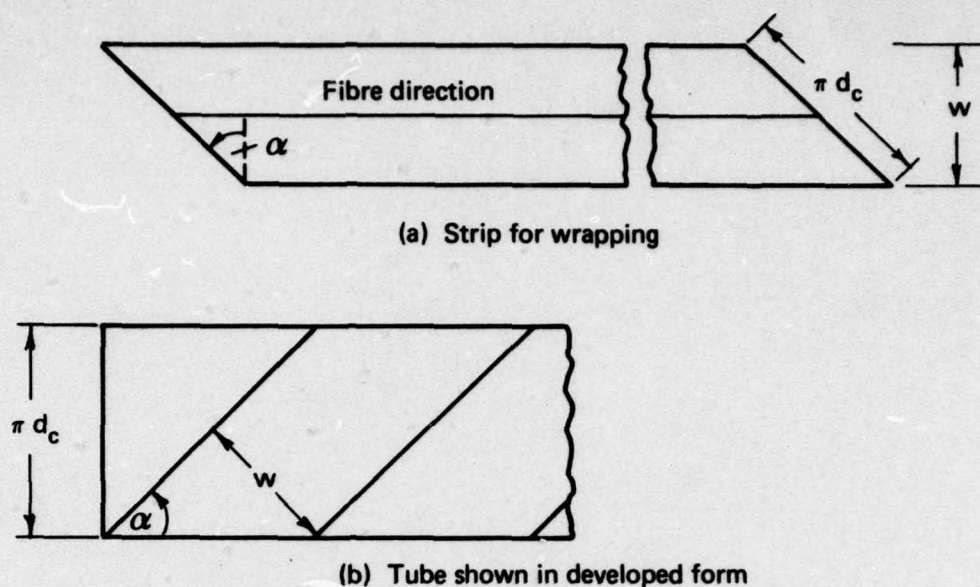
SHEET WRAPPING PROCEDURE FOR TUBE MANUFACTURE
